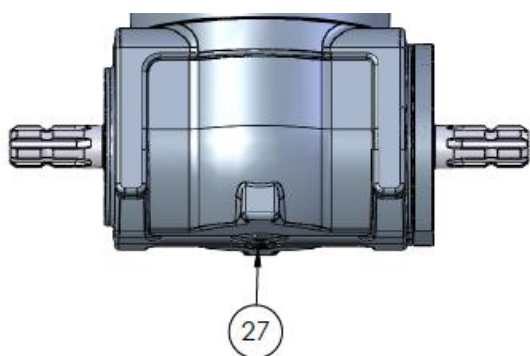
Planetary drive gearbox EC3320/FE $i = 19.95$
